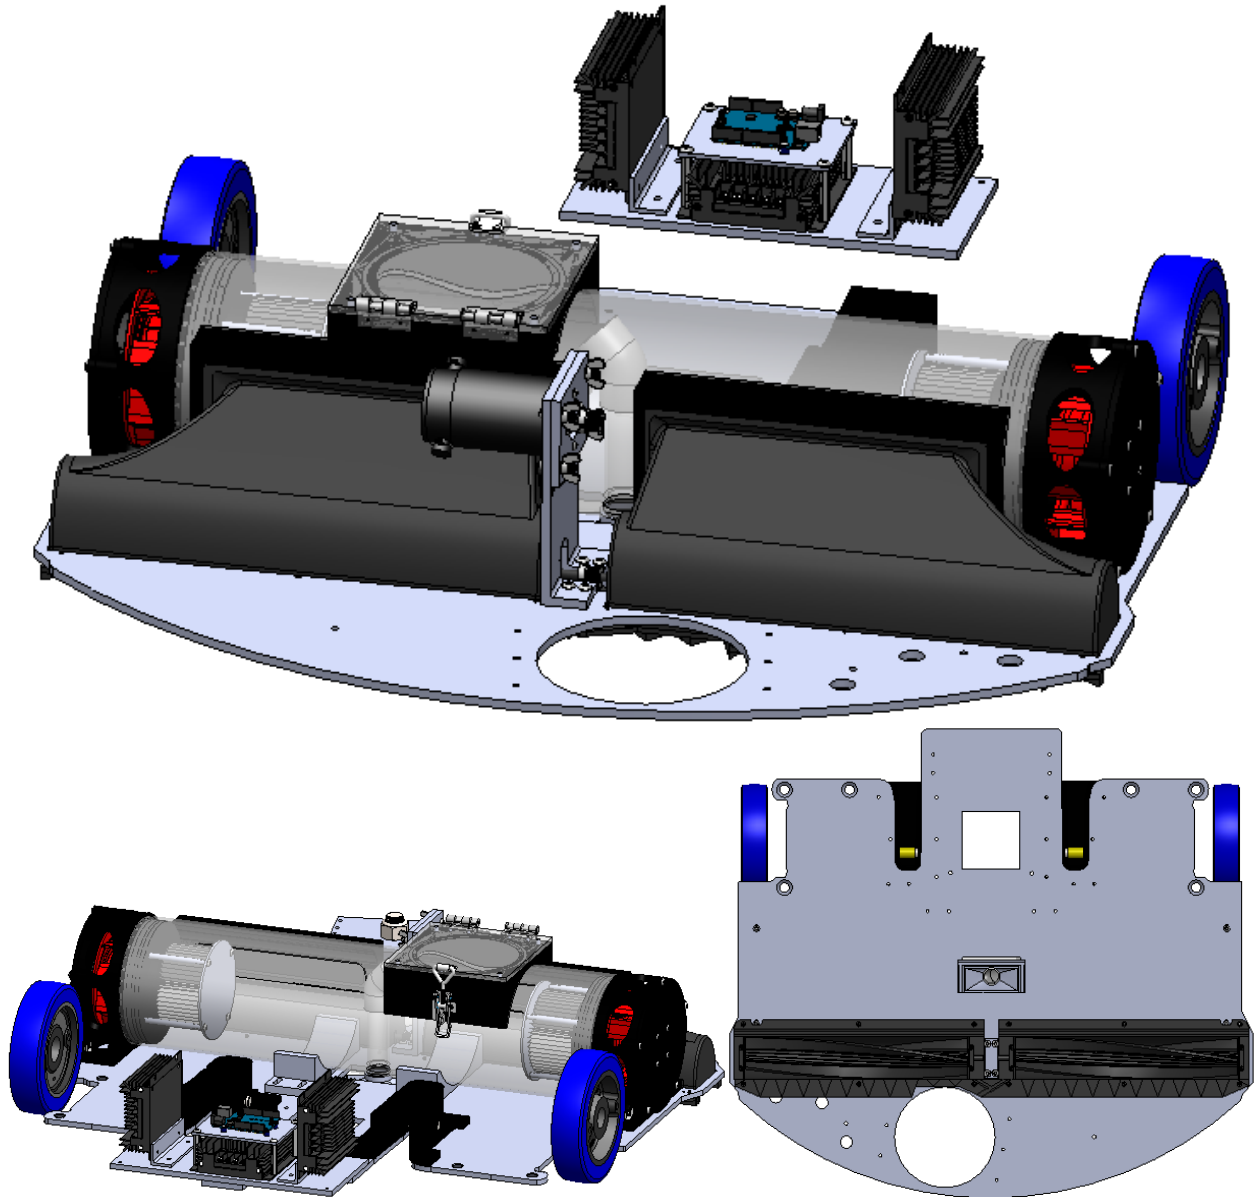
OVERVIEW OF CAD FOR SECOND PROTOTYPE. THE FRONT CASTER WHEEL HAS ALSO BEEN REMOVED FROM THIS IMAGE TO ALLOW FOR BETTER VISUALIZATION OF THE BRUSH MOTOR MOUNTING.
